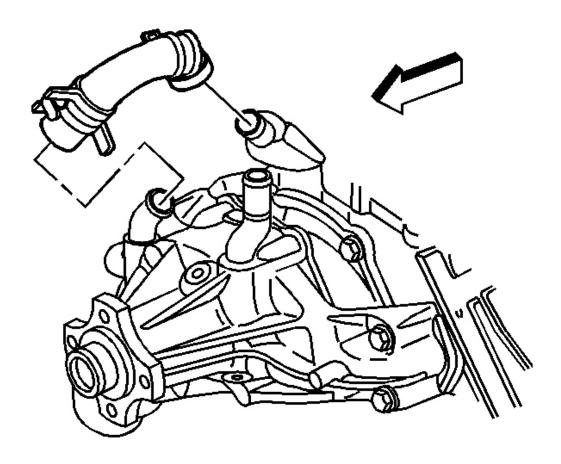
View Of Water Pump Inlet Hose & Clamps Courtesy of GENERAL MOTORS CORP.
